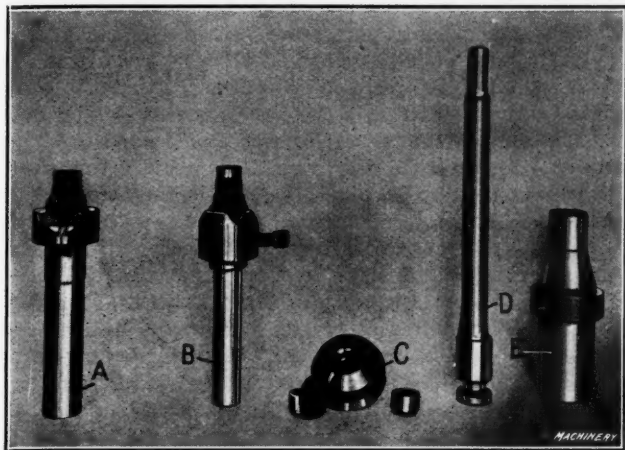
Combination Blanking, Cupping and Drawing Punch and Die, and the Tools used for making the Die
